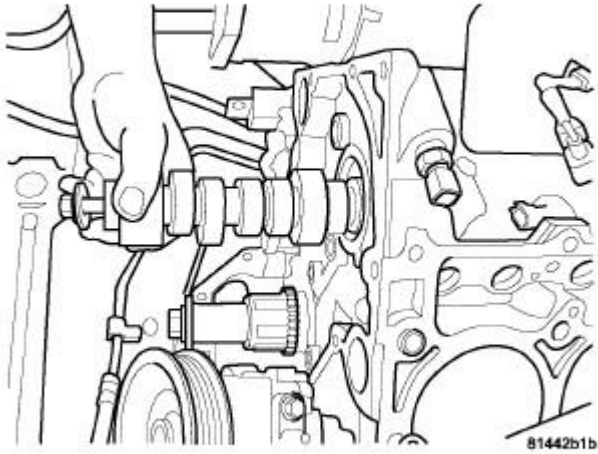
CAMSHAFT REMOVAL/INSTALLATION
